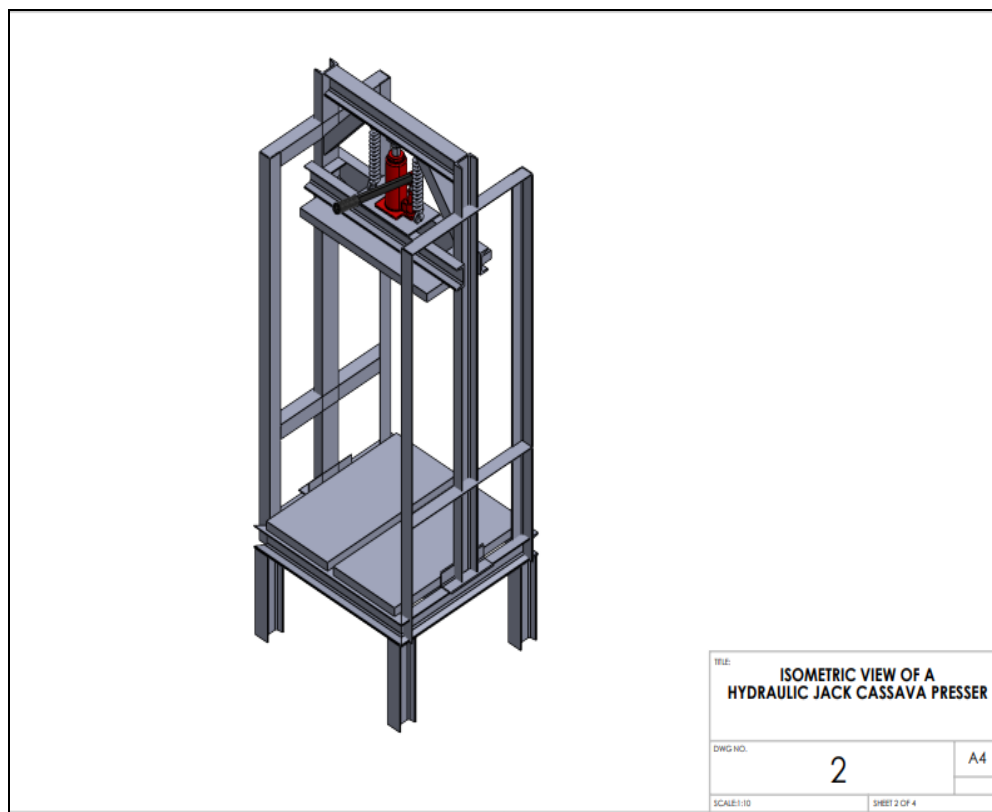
Isometric Drawing of Cassava Mash Dewatering Machine
